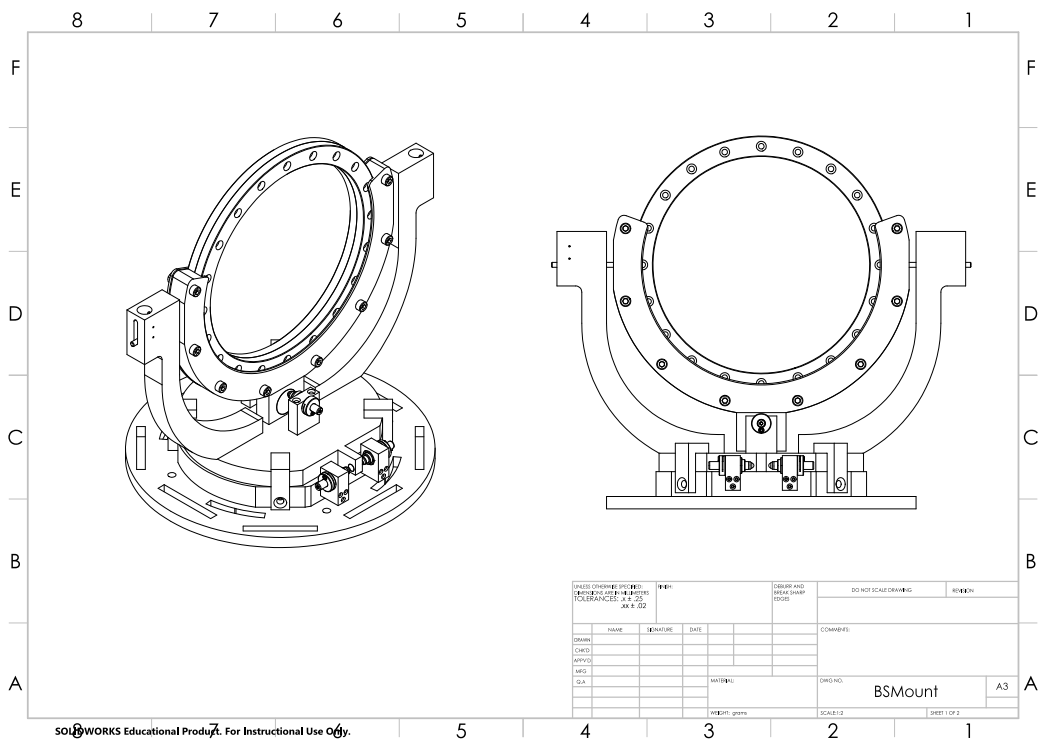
Beamsplitter assembly. Drawing provided by Adam Sundberg.
